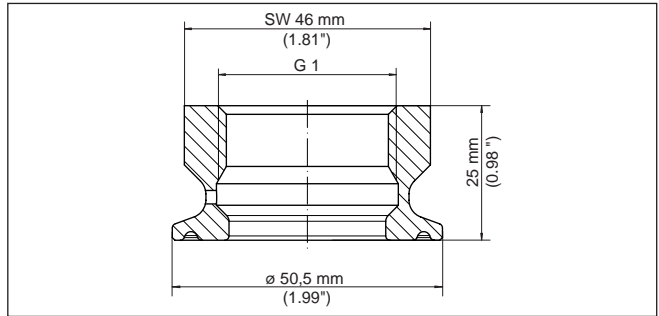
Dimensions hygienic adapter G1 (DIN 3852-X) on Clamp 1½" (DIN 32676, ISO 2852) PN 40 - O-ring seal
